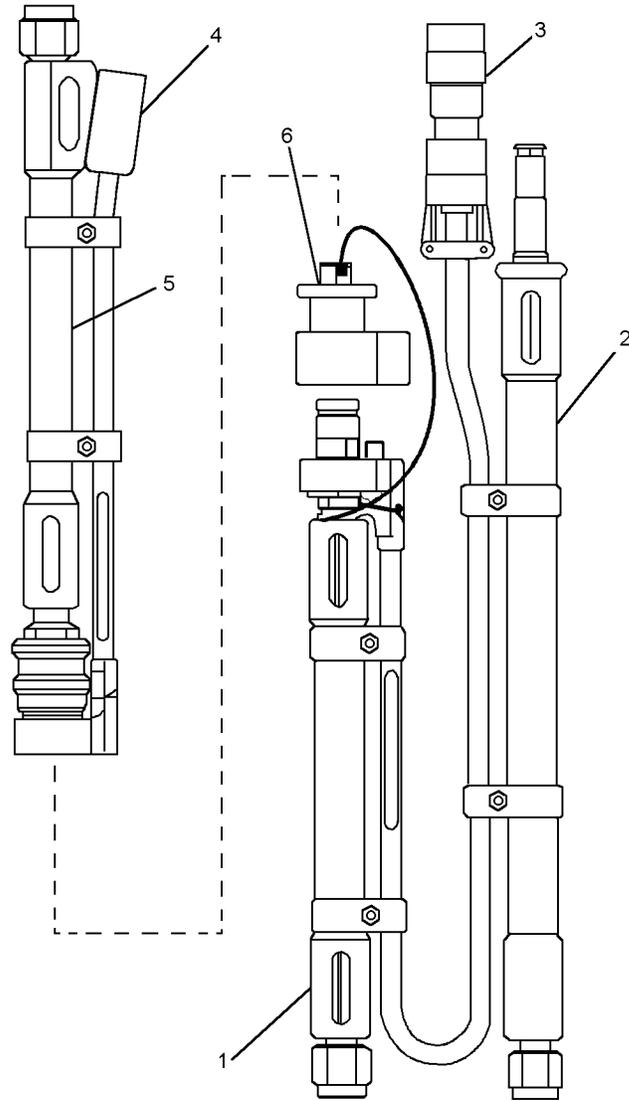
SKU-7/A, SKU-10/A, and SKU-11/A Oxygen Hose Assemblies
